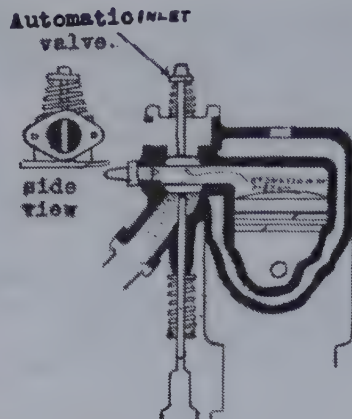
Showing view of cylinder with an "auto-matic" inlet valve. Exhaust valve "mechanically" operated.
